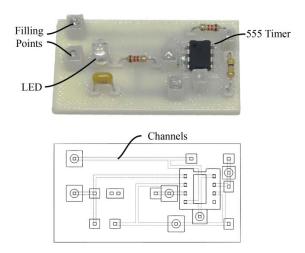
A circuit having through-hole components was fabricated in a FDM part. This part demonstrates connection of traces to DIP components, and the capability to inject traces that split into multiple paths.
